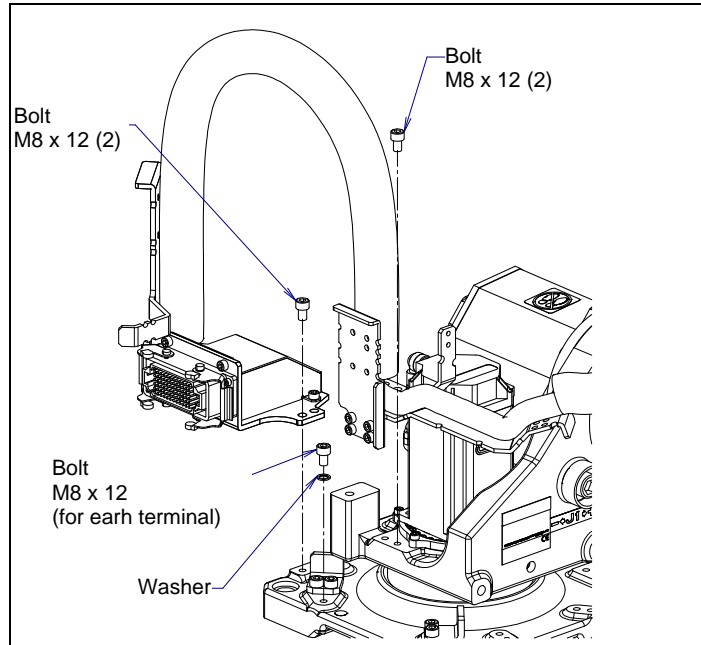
(g) Replacing the cable kit (without pedestal J2 base)
